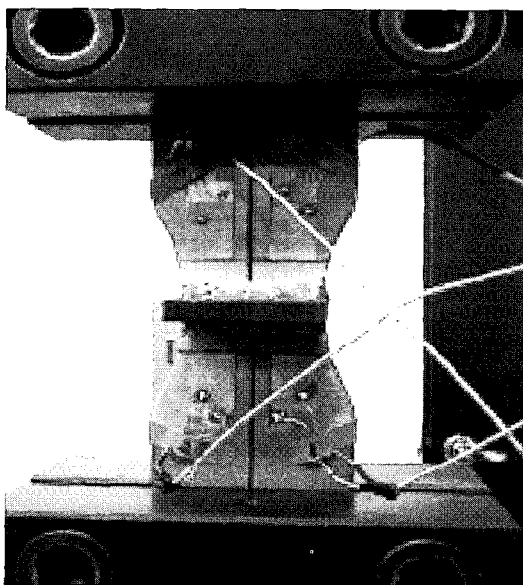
Weld test specimen installed in fatigue test machine
